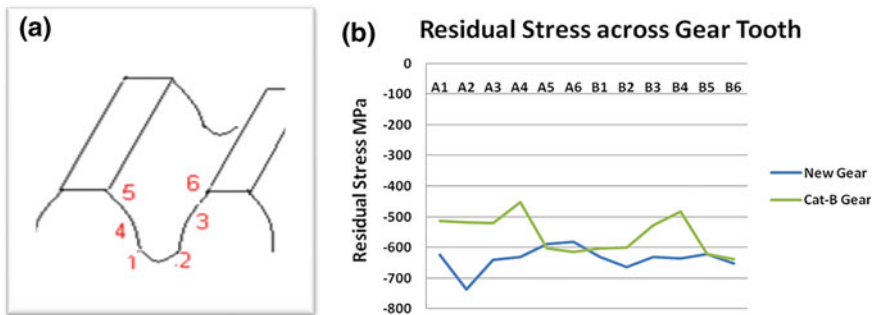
Residual stress measurement a sketch showing the points on the gear teeth b Stress across various sections of gear tooth on new and cat-B gear
